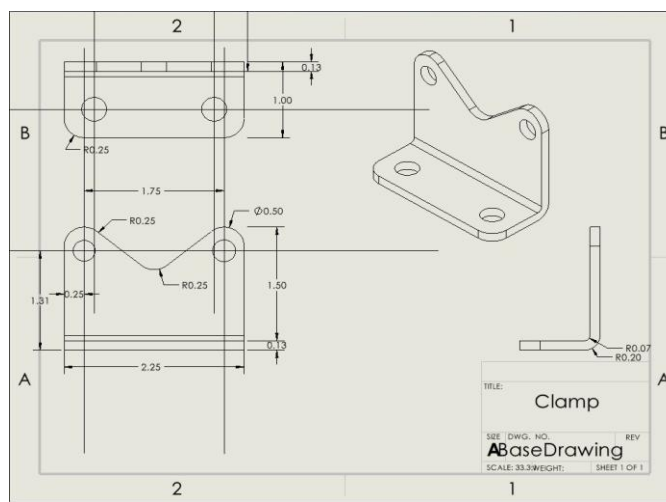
3D dimensioned drawing of the clamp's supporting base
